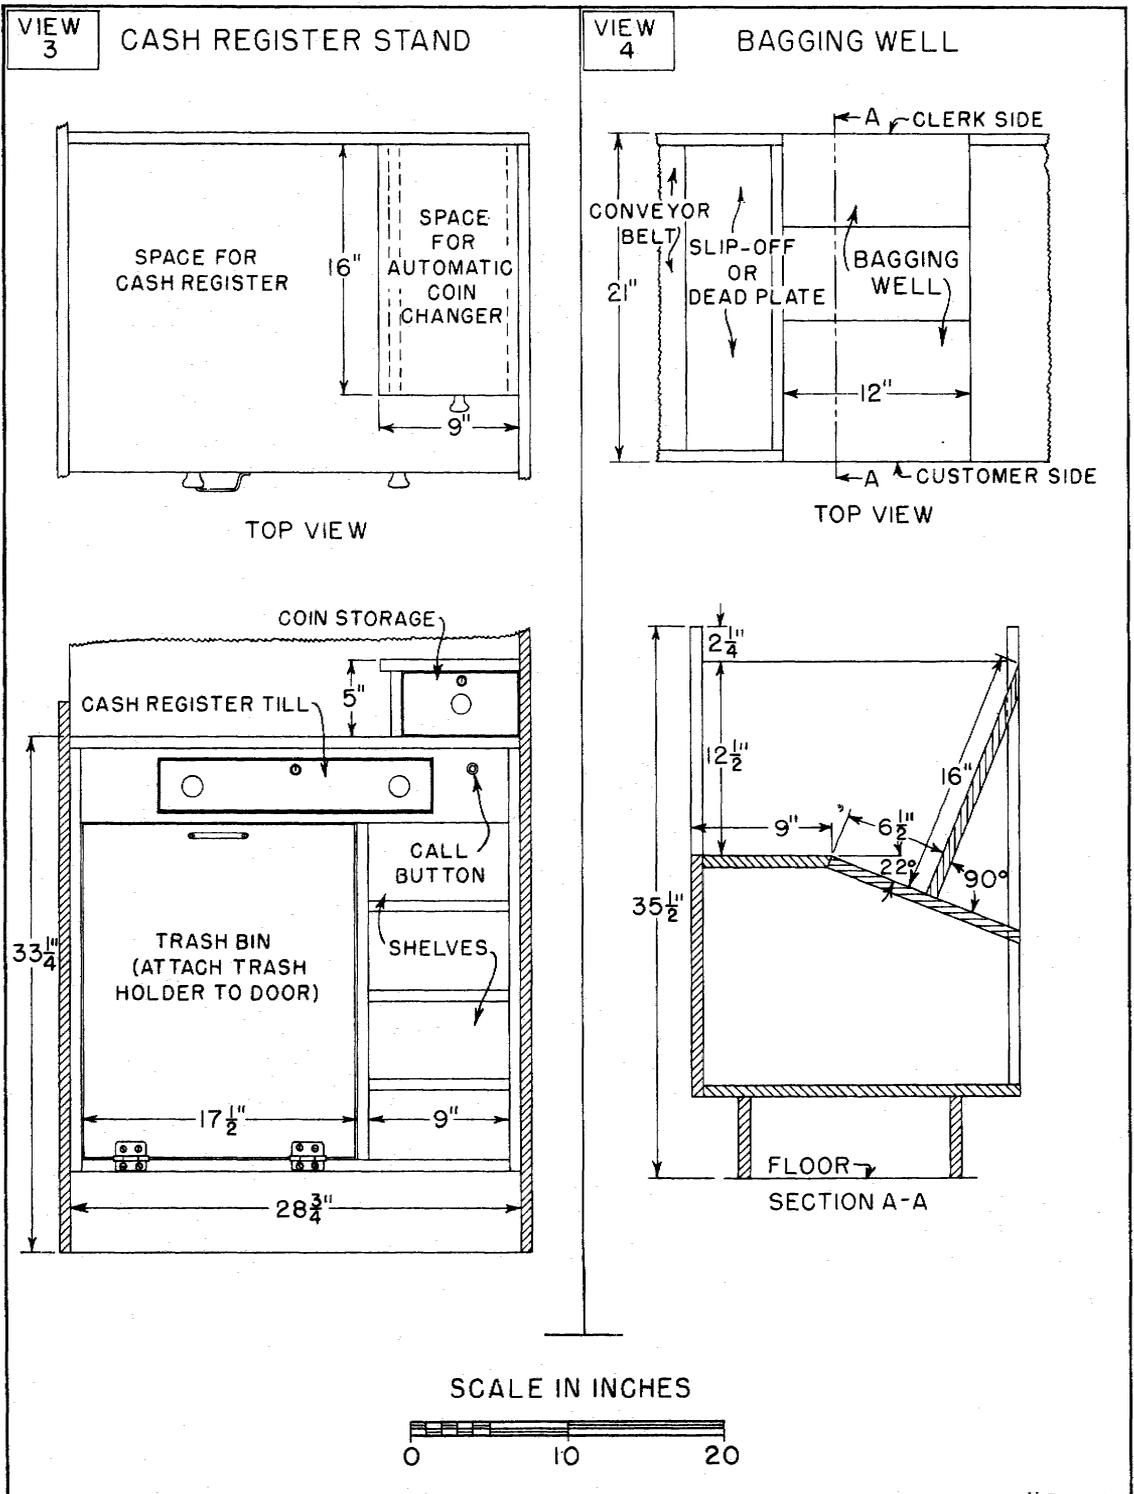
Detailed views of cash register stand and bagging well of Redi-chek conveyor check-out counter.
